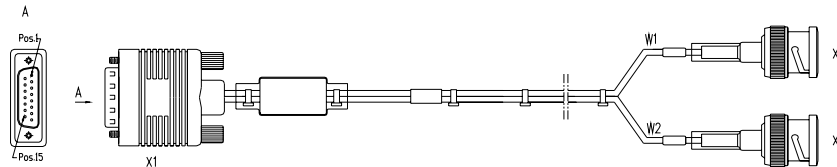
E1 75-ohm unbalanced coaxial cable
